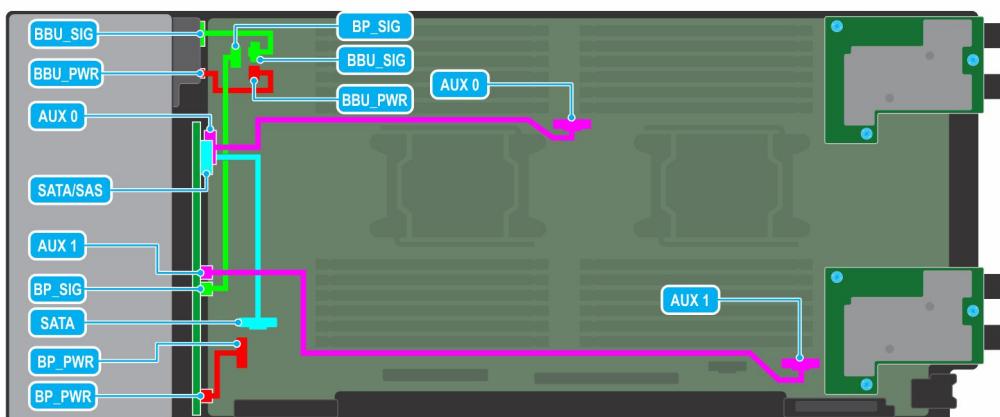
Cable routing - 4 x 2.5-inch backplane BBU cabling.
